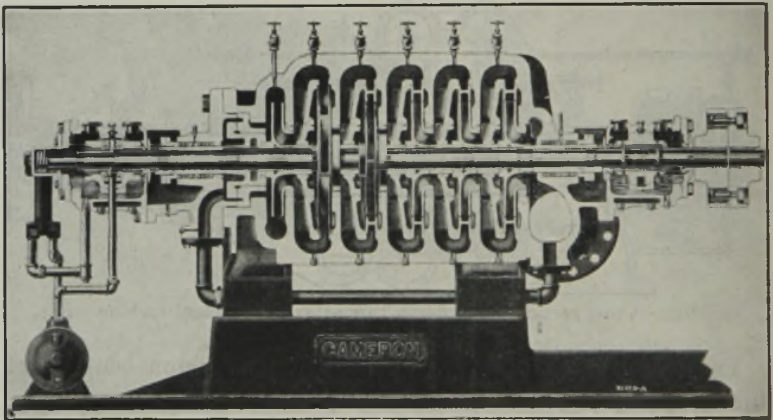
Cross section of six-stage Cameron class HMT pump equipped with force-feed lubrication.
